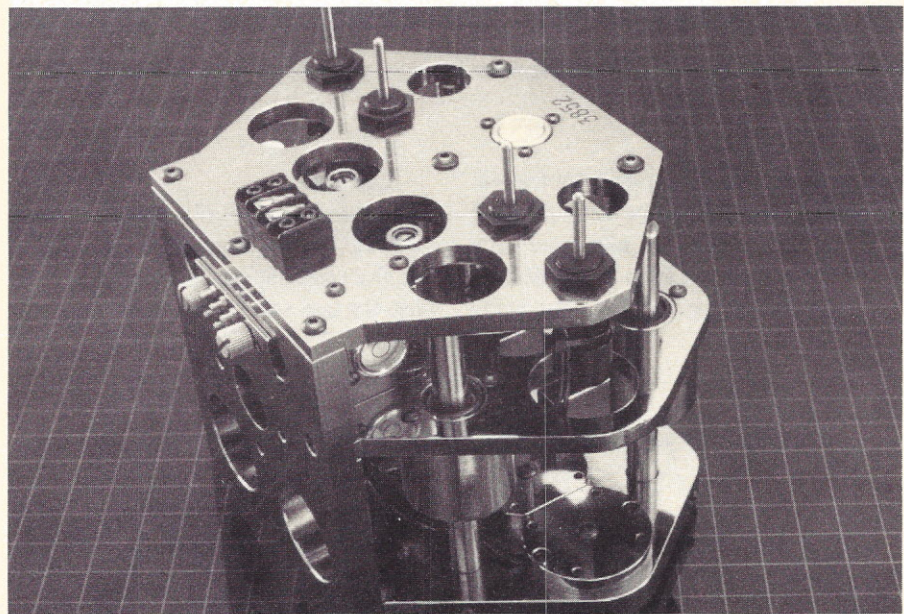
The four sensors (perpendicular to the faceplate) have built-in anti-window-locking features for probing cavities on an arc. They are designed to sense bushings stuck in an injection molding machine.
